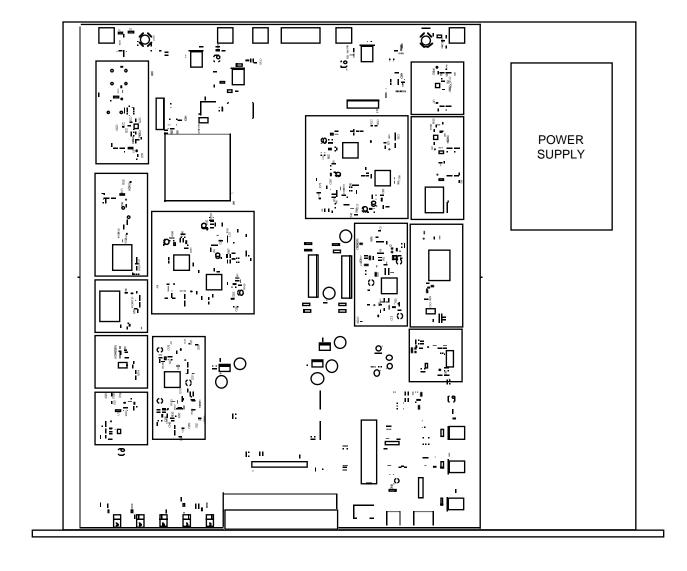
Model 2017-1625-140# Mechanical Assembly
